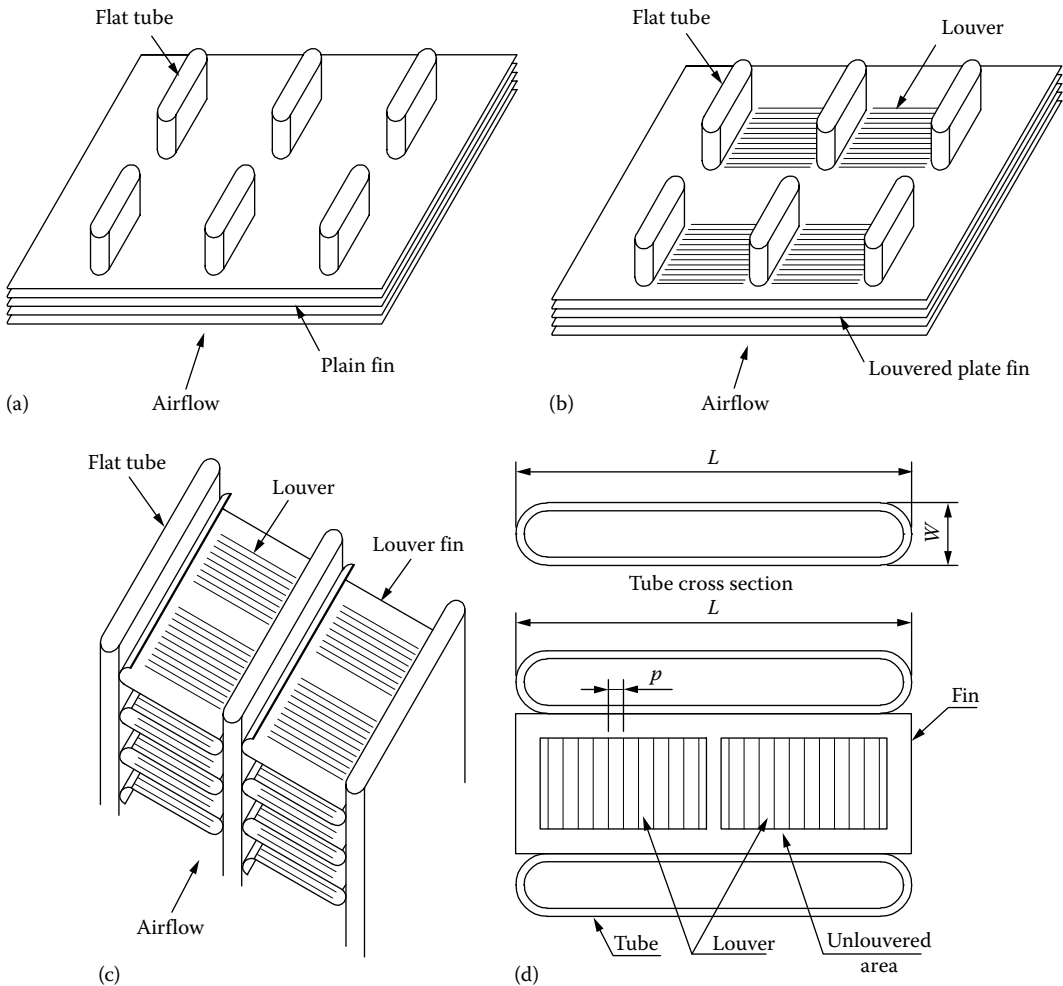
Tube-fin details of radiator: (a) continuous plain fin-flat tube radiator, (b) continuous louvered fin-flat tube design, (c) single flat tube row louvered fin radiator design, and (d) tube-fin details.
